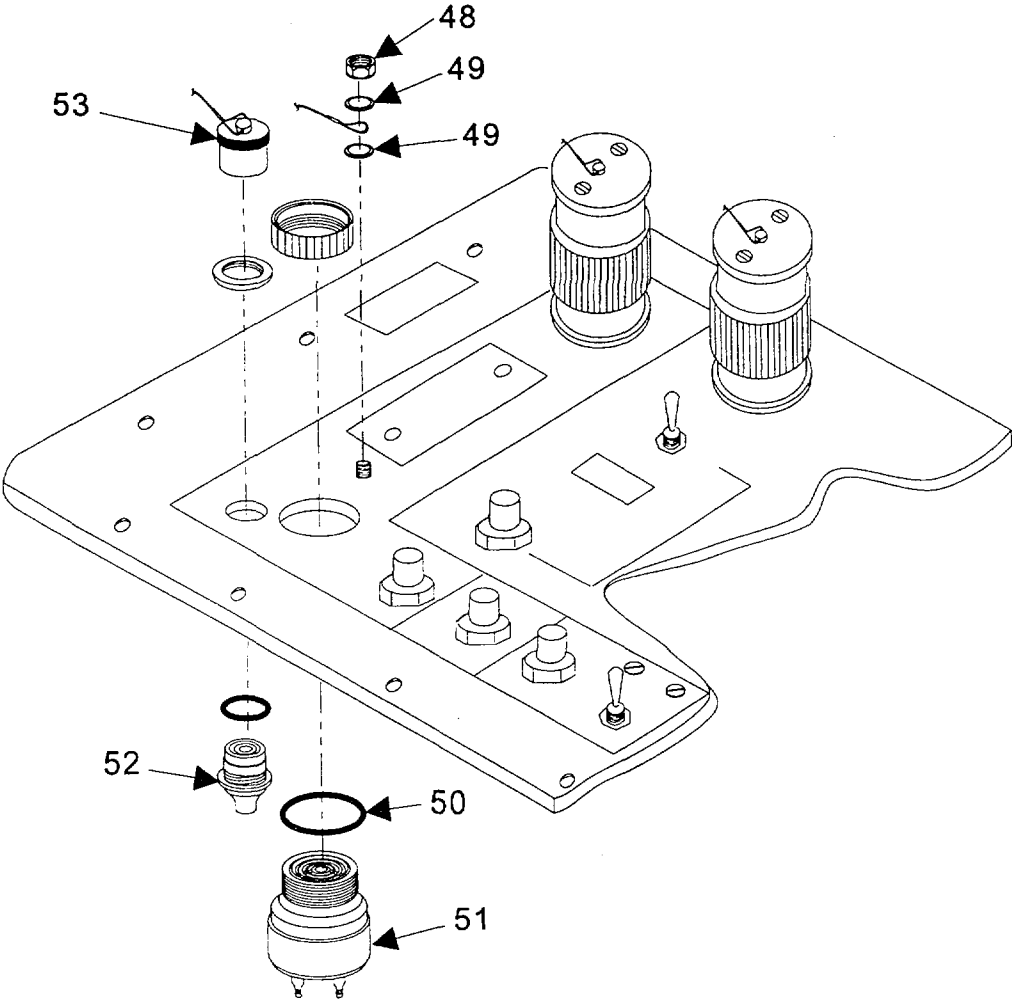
Panel Assembly (Sheet 6 of 7).
